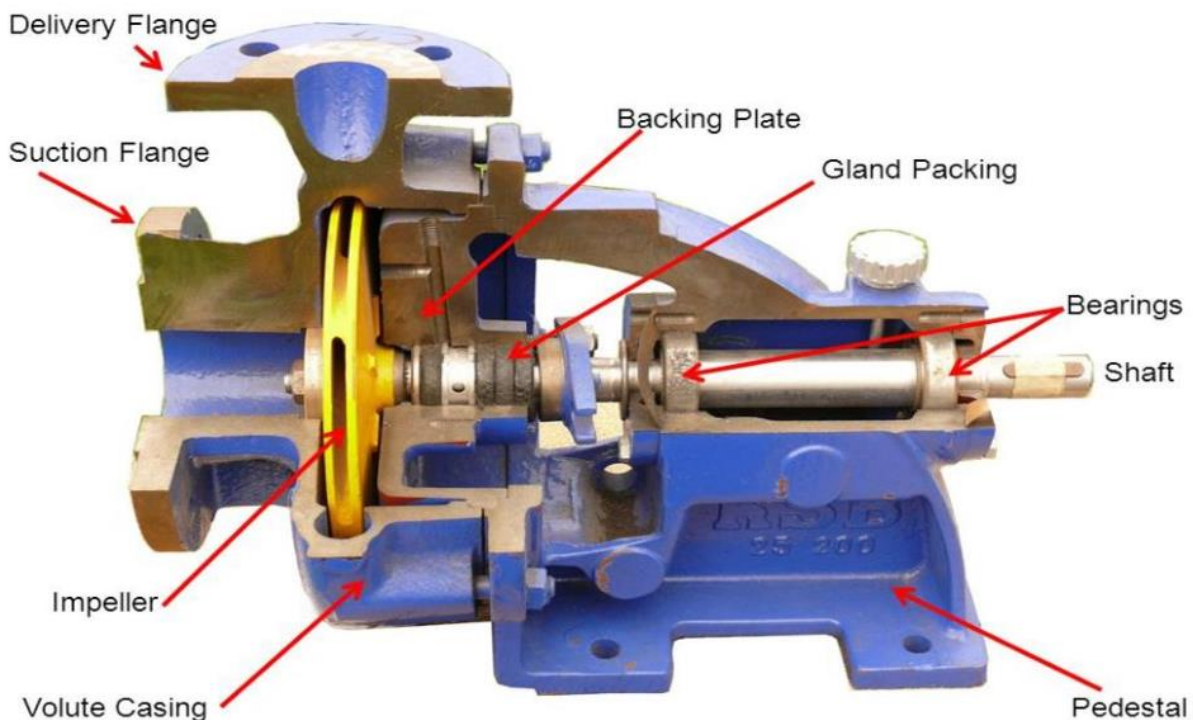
Journal Bearing mounted on Centrifugal Pump
